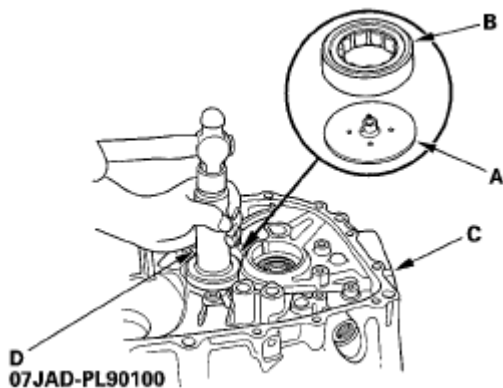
Positioning Oil Guide Plate, Needle Bearing And Clutch Housing
